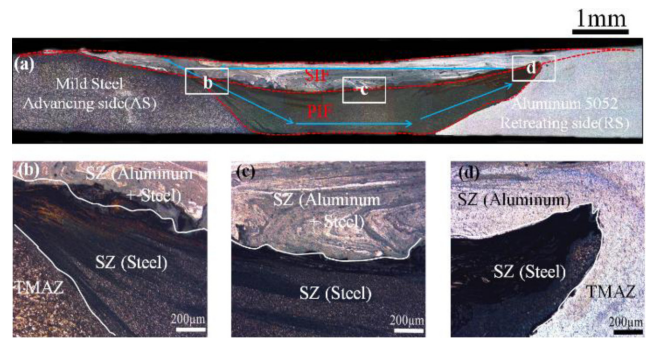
(a) Material flow path and weld cross section for 800/75 combination of parameters (b), (c), and (d) are magnified zones in advancing, central and retreating side as marked in the weld cross section
